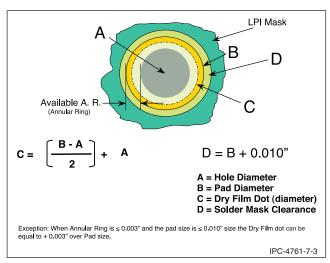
Top View Illustration of Solder Mask Clearance around a BGA Pad
